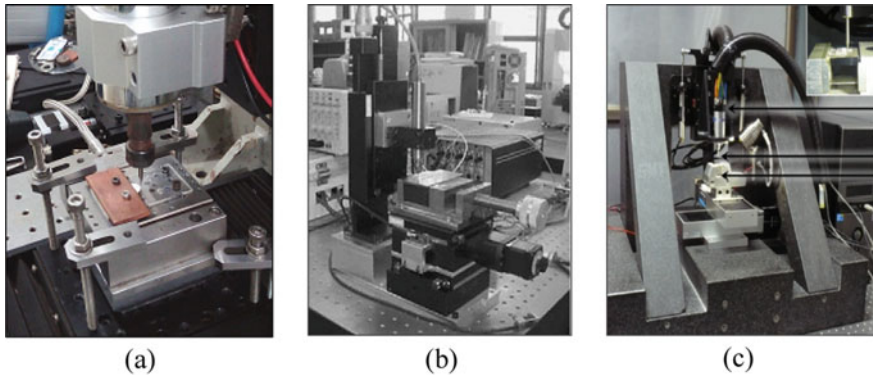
Miniaturized micro-machine tools, a Constructed micro-milling machine [11]; b Miniaturized 3-axis machine tool [17]; c High-speed micro-machining centre [18]
